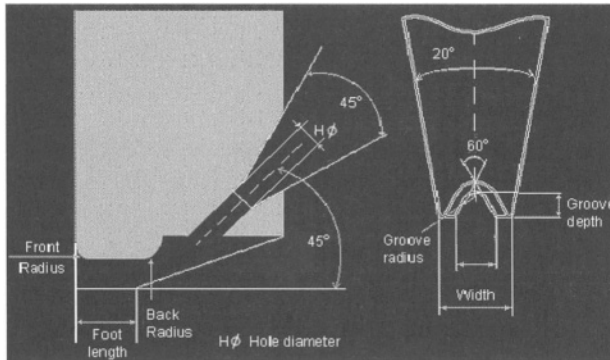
Heavy wire wedge tool design with V-groove [P-11]
